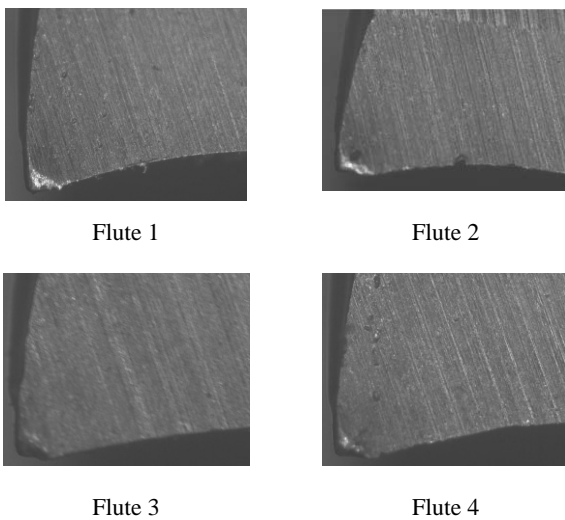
Flank wear -dry milling - cutting speed 10 m/min for 10 min
